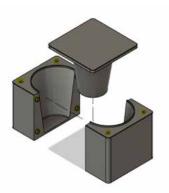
Exploded view of cup mold Mold exploded view, highlighting pin guides.
